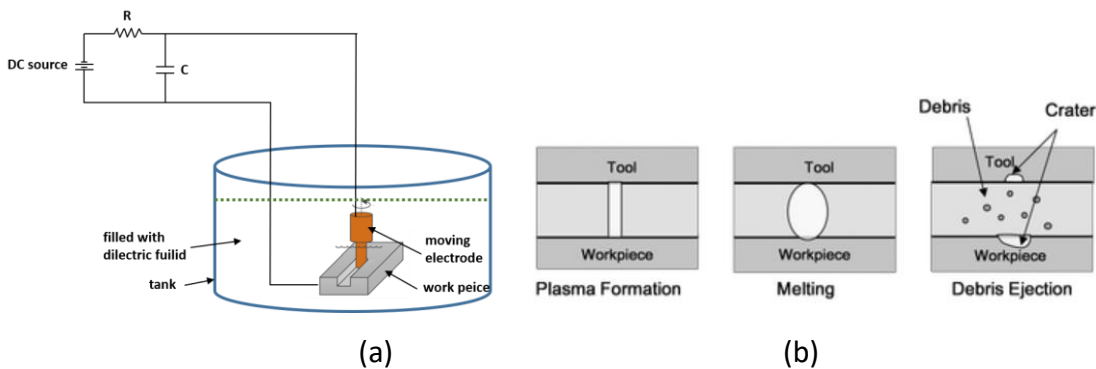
EDM working principle: (a) simplified schematic view, and (b) material removal mechanism [154].
